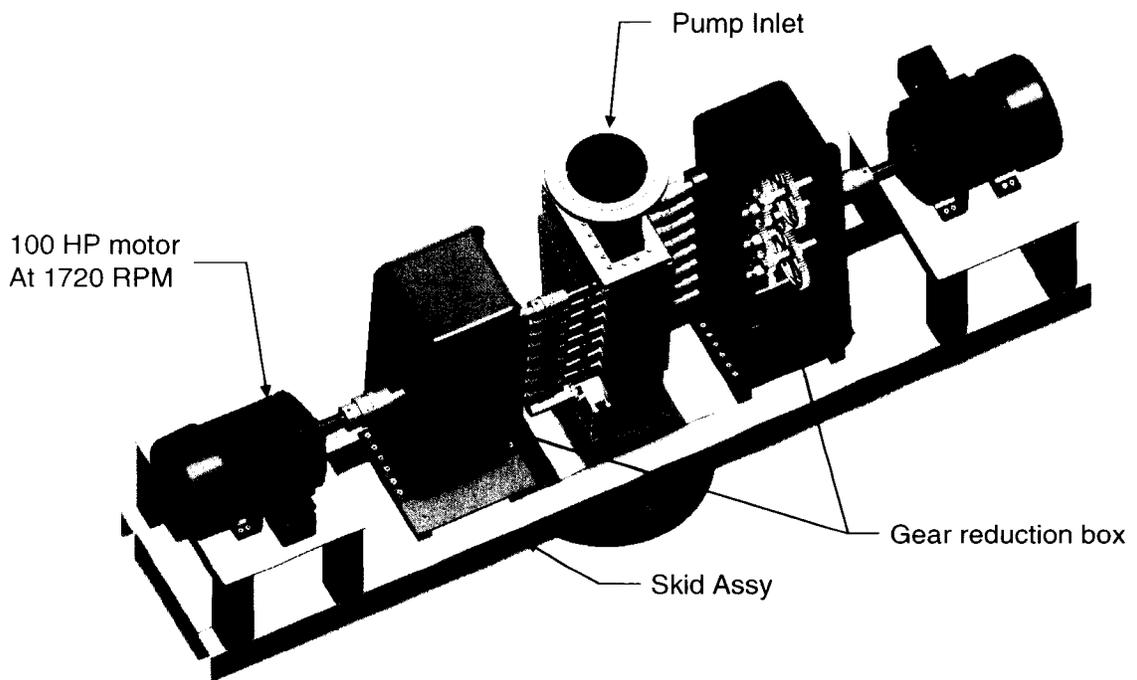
Upper View of Rolling Mill Linear Extrusion Pump
